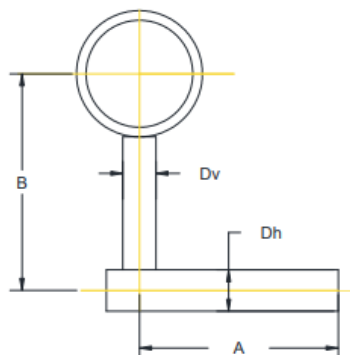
ADJUSTABLE HANDRAIL BRACKET
